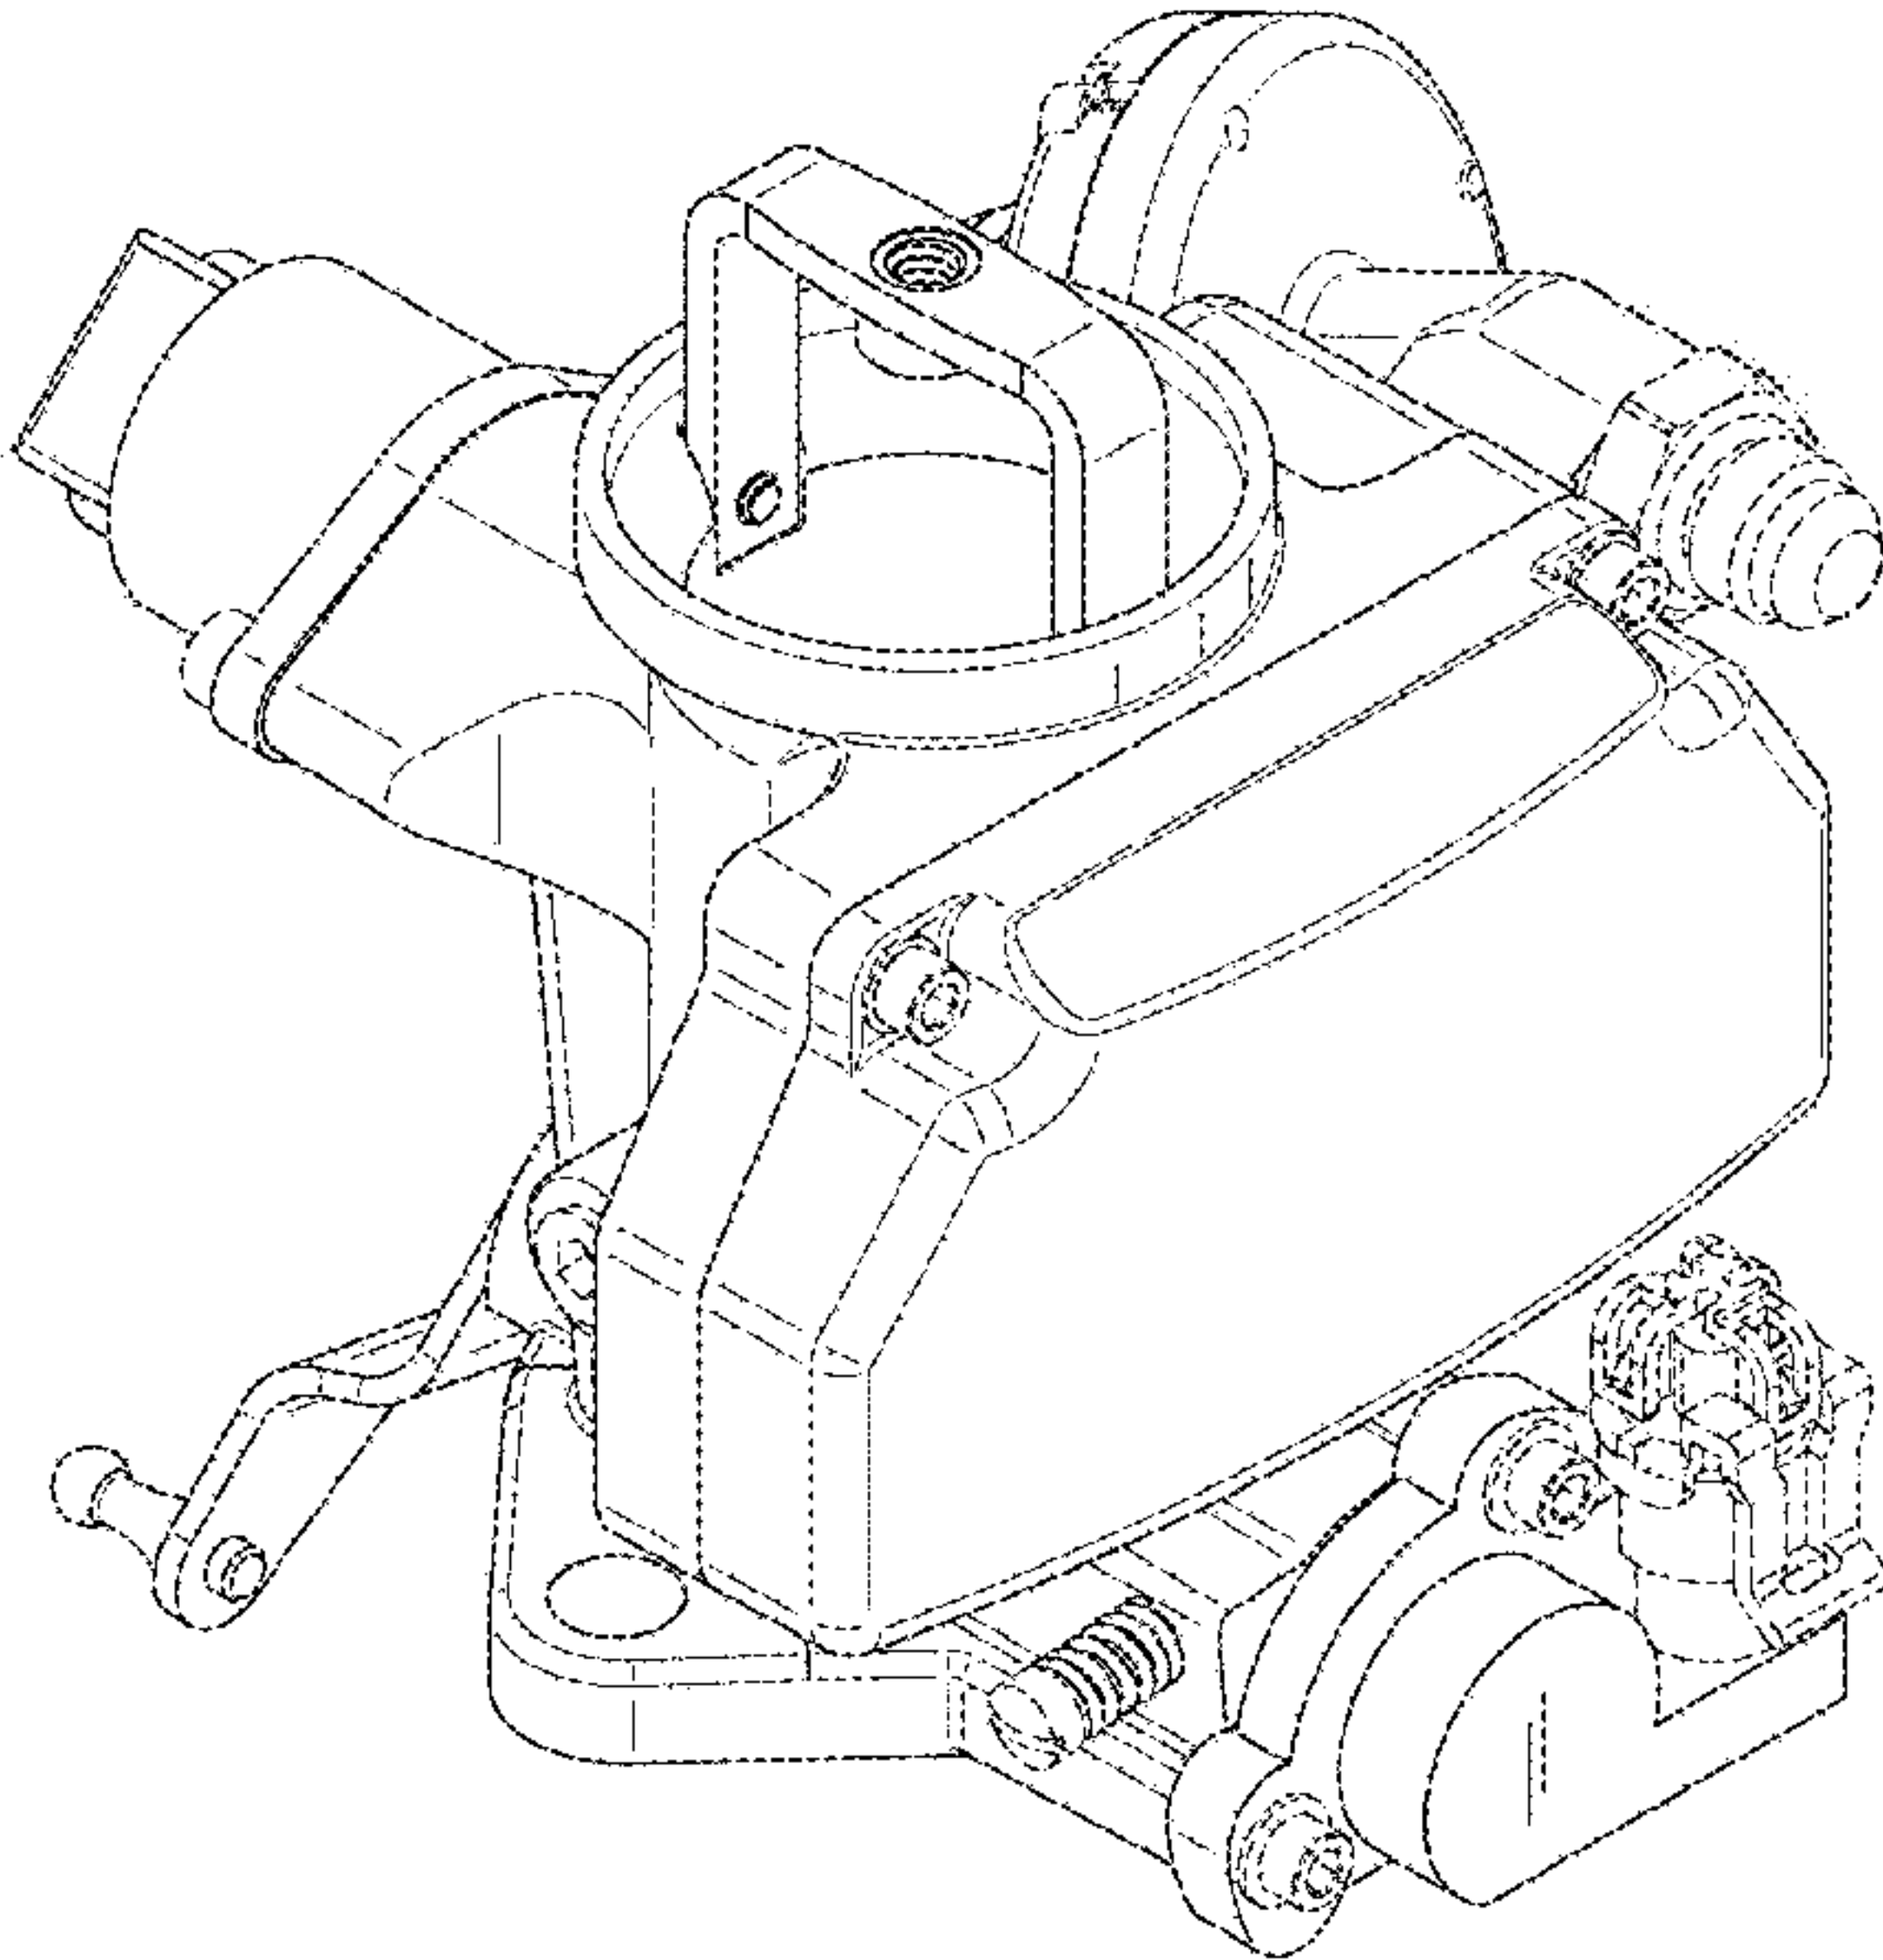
is a first perspective view of an electronic fuel injection throttle body showing our new design;
